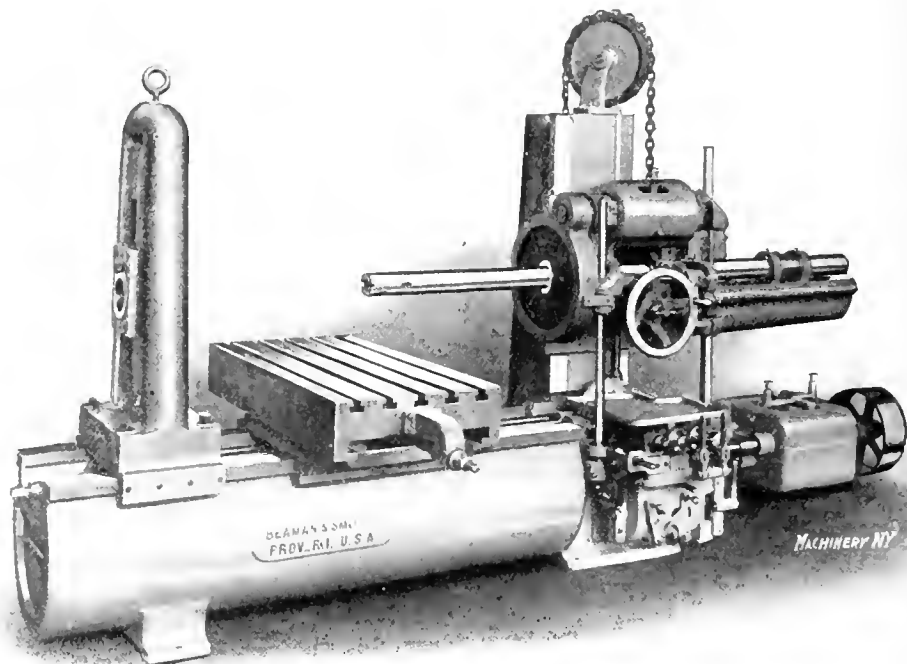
Beaman & Smith Horizontal Boring and Milling Machine
